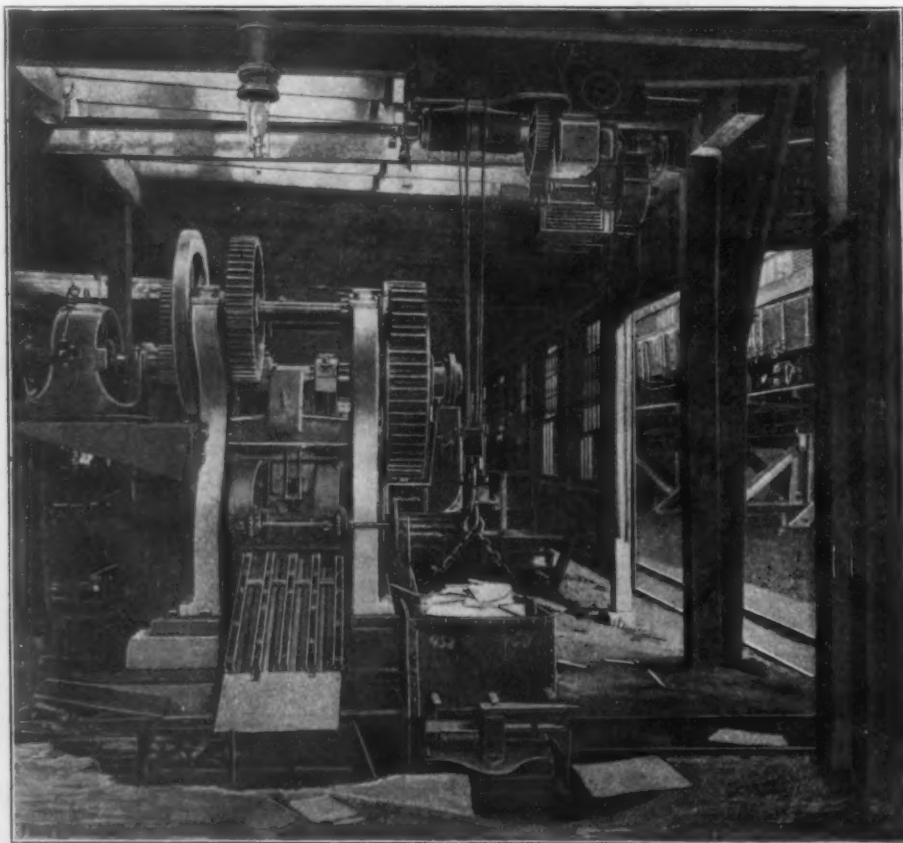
42-Inch Electrically Driven Shear and 5-Ton Electric Hoist and Traveler.
